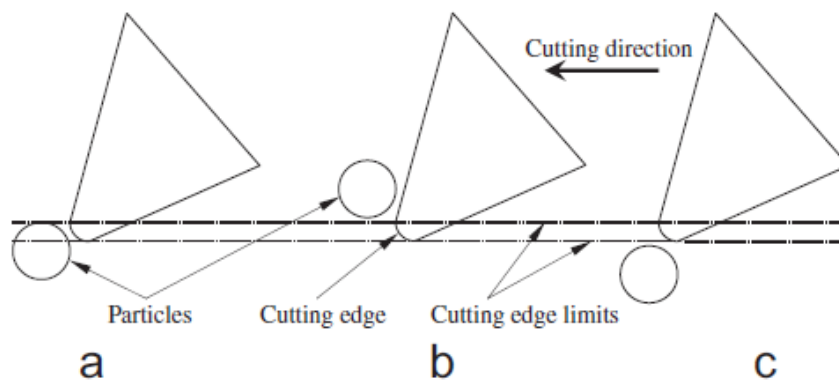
Tool-particle interaction (a) along the cutting edge (b) above the cutting edge (c) below the cutting edge [64].
